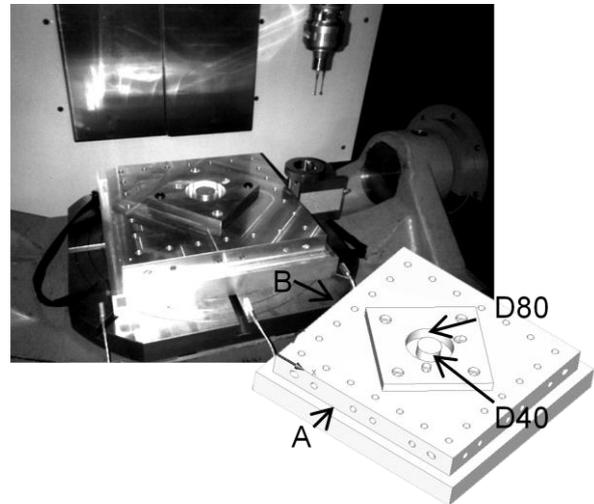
Certificated Standard measured with Tactile Touchprobe on Machine Tool Hermle C800U at WZL
